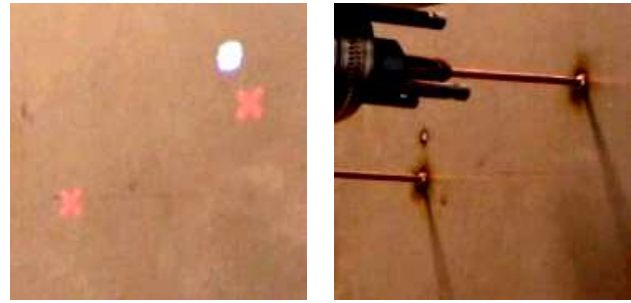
Robot tool includes stud-welding gun, projector, and 3D sensor.
